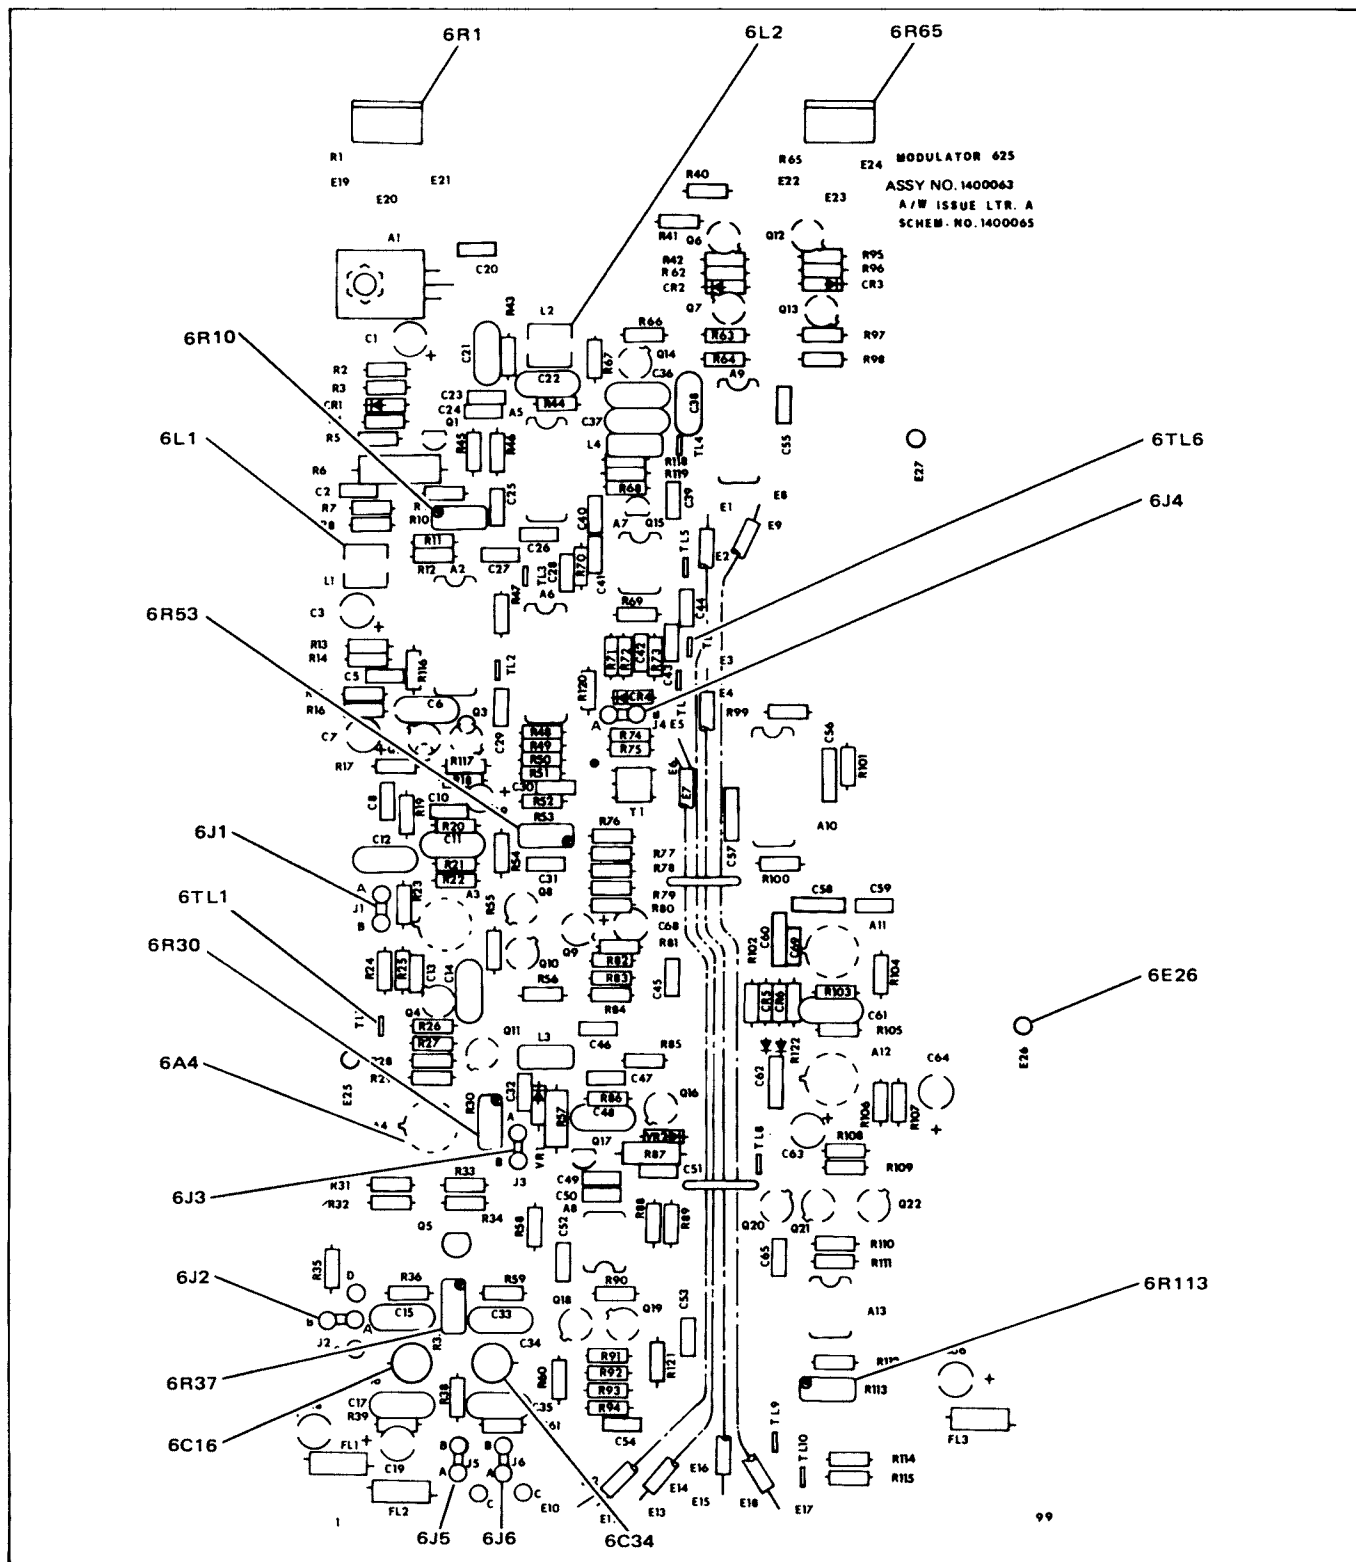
Modulator PWA 6 (625), Assembly No. 1400063
